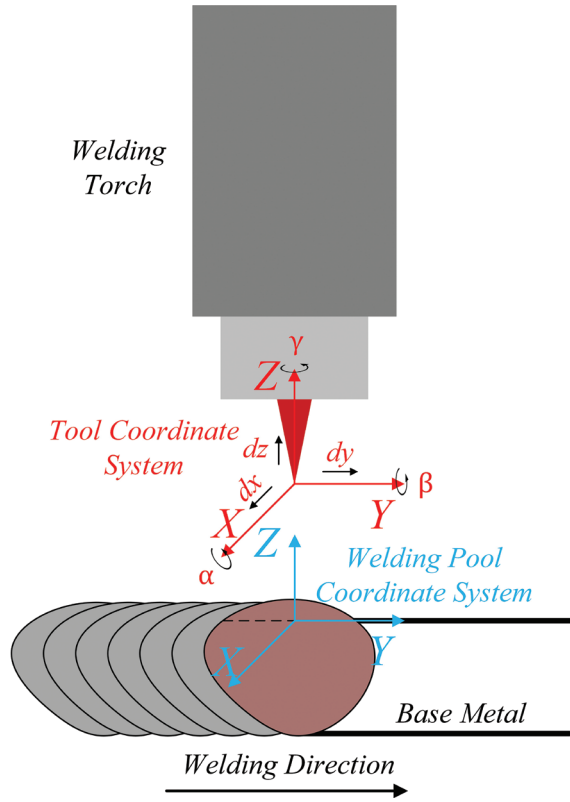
TCS (the tool coordinate system) and WPCS (the weld pool coordinate system).
